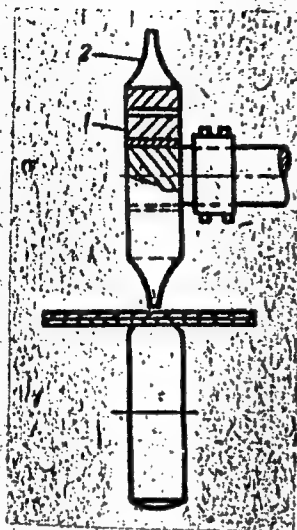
Ultrasonic seam-welding unit. 1 - magnetostriictic converter; 2 - disk device
